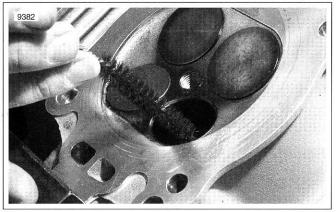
Valve Guide Cleaning Brush (HD-34751) 3-30 2003 VRSCA: Engine
